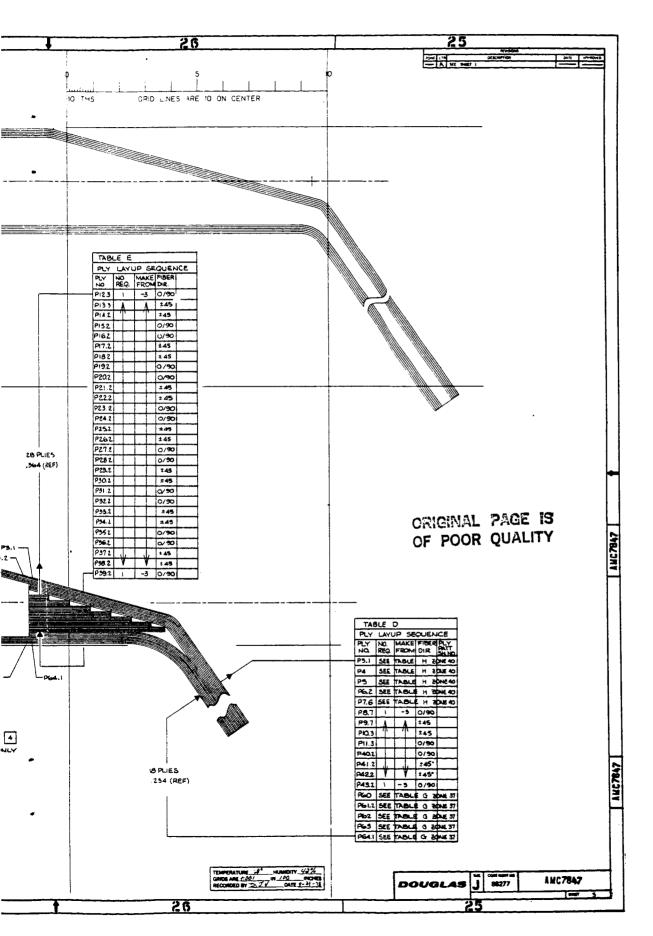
DRAWING AMC7847 — FORWARD CENTER SPAR ASSEMB
